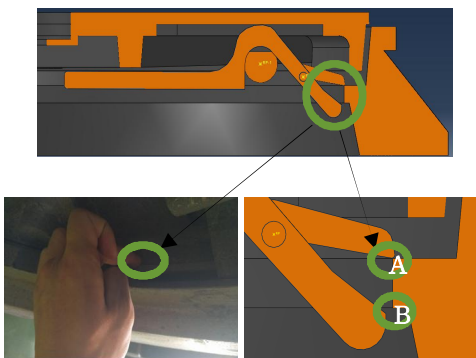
Clearance checking of hook and lifting device using 3D CAD Model
